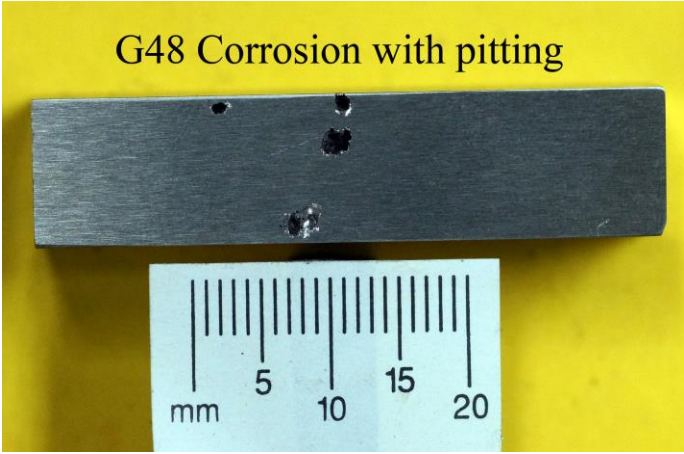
G48 TEST SPECIMEN WITH PITTING
